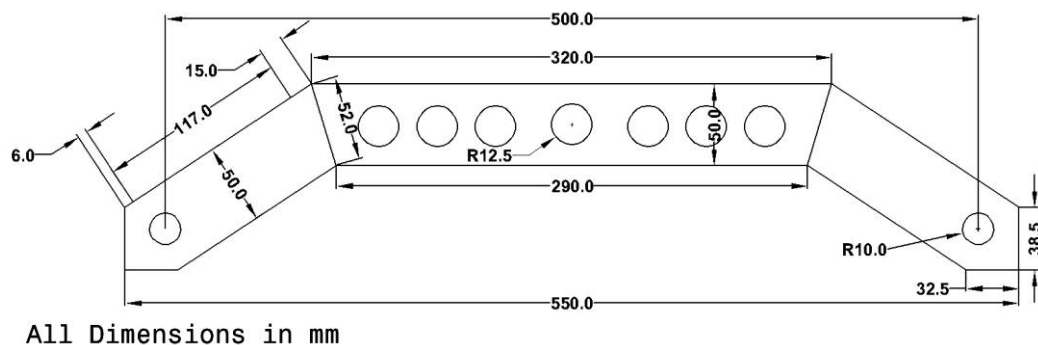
Rocker Frame of the Mobile Robot Suspension
